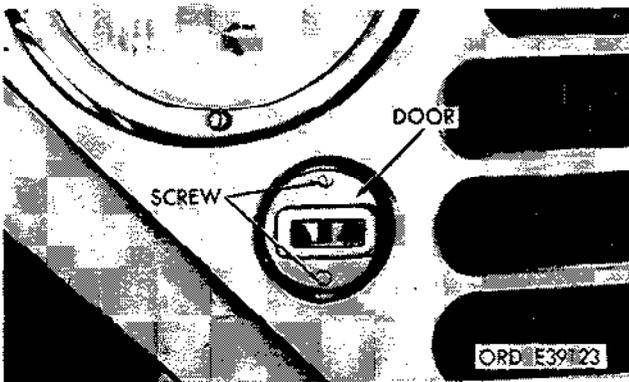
Remove blackout marker door assembly. (M151, M151A1, M151A1C and M718 vehicles)
